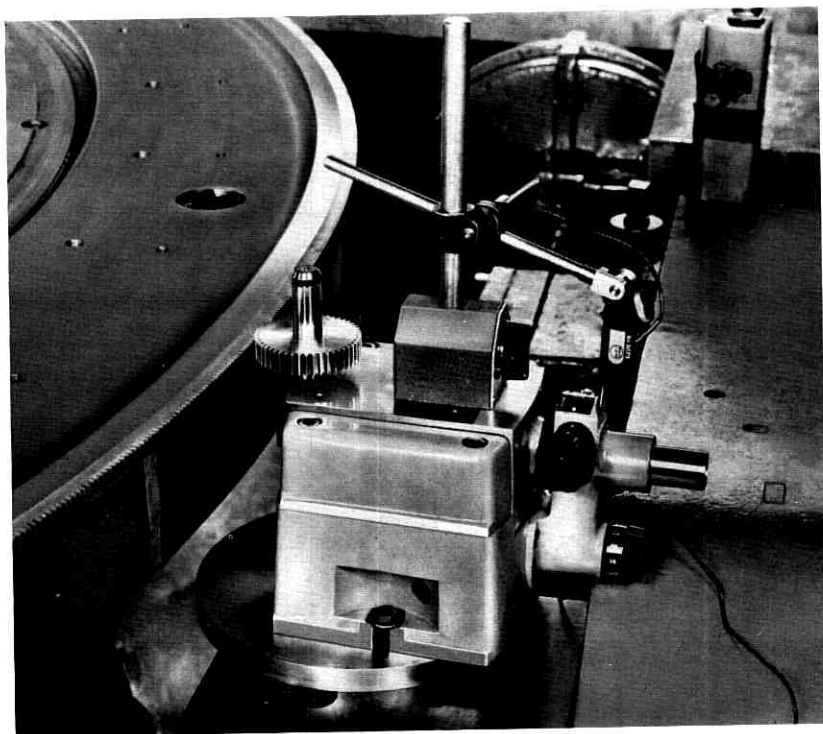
Test equipment for checking gear tooth-to-tooth error and pitch circle runout.
